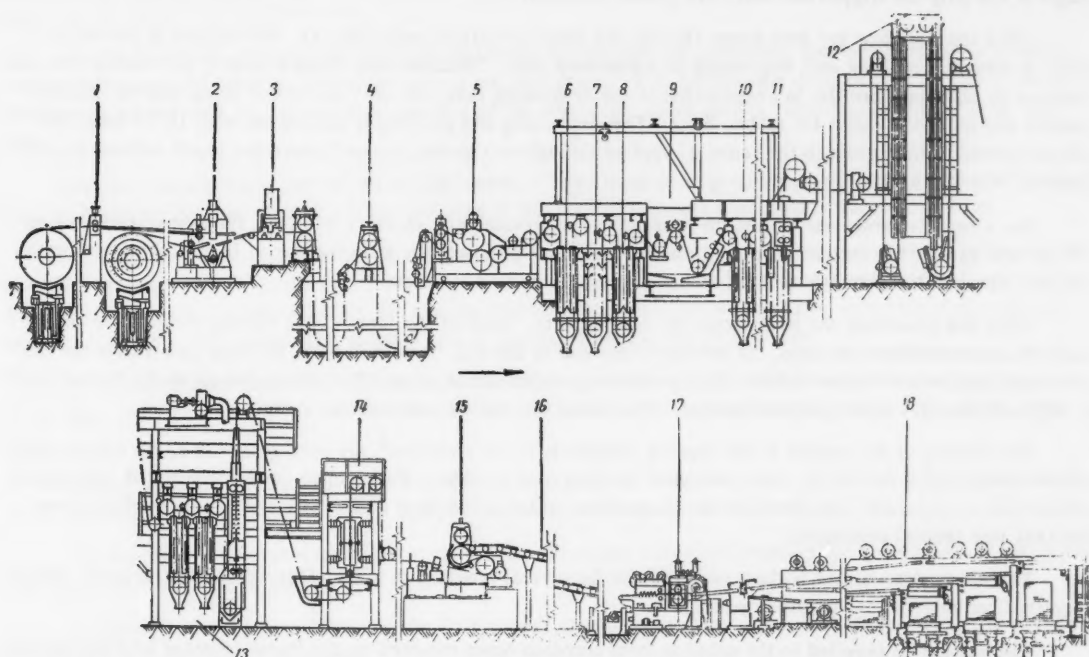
The electrolytic tinning plant at the Velindre Works 1) decoiling unit (two decoilers); 2) double-cut shears; 3) welding machine; 4) looping pits; 5) driving unit; 6) degreasing tank; 7) rinsing tank; 8) pickling tank; 9) brushing and washing machine; 10) coating tanks (8 tanks); 11) picking-up tanks; 12) melting unit; 13) passivating unit; 14) electrolytic oiling machine; 15) stretching unit; 16) conveyer; 17) flying shears; 18) sorting and packing section.
